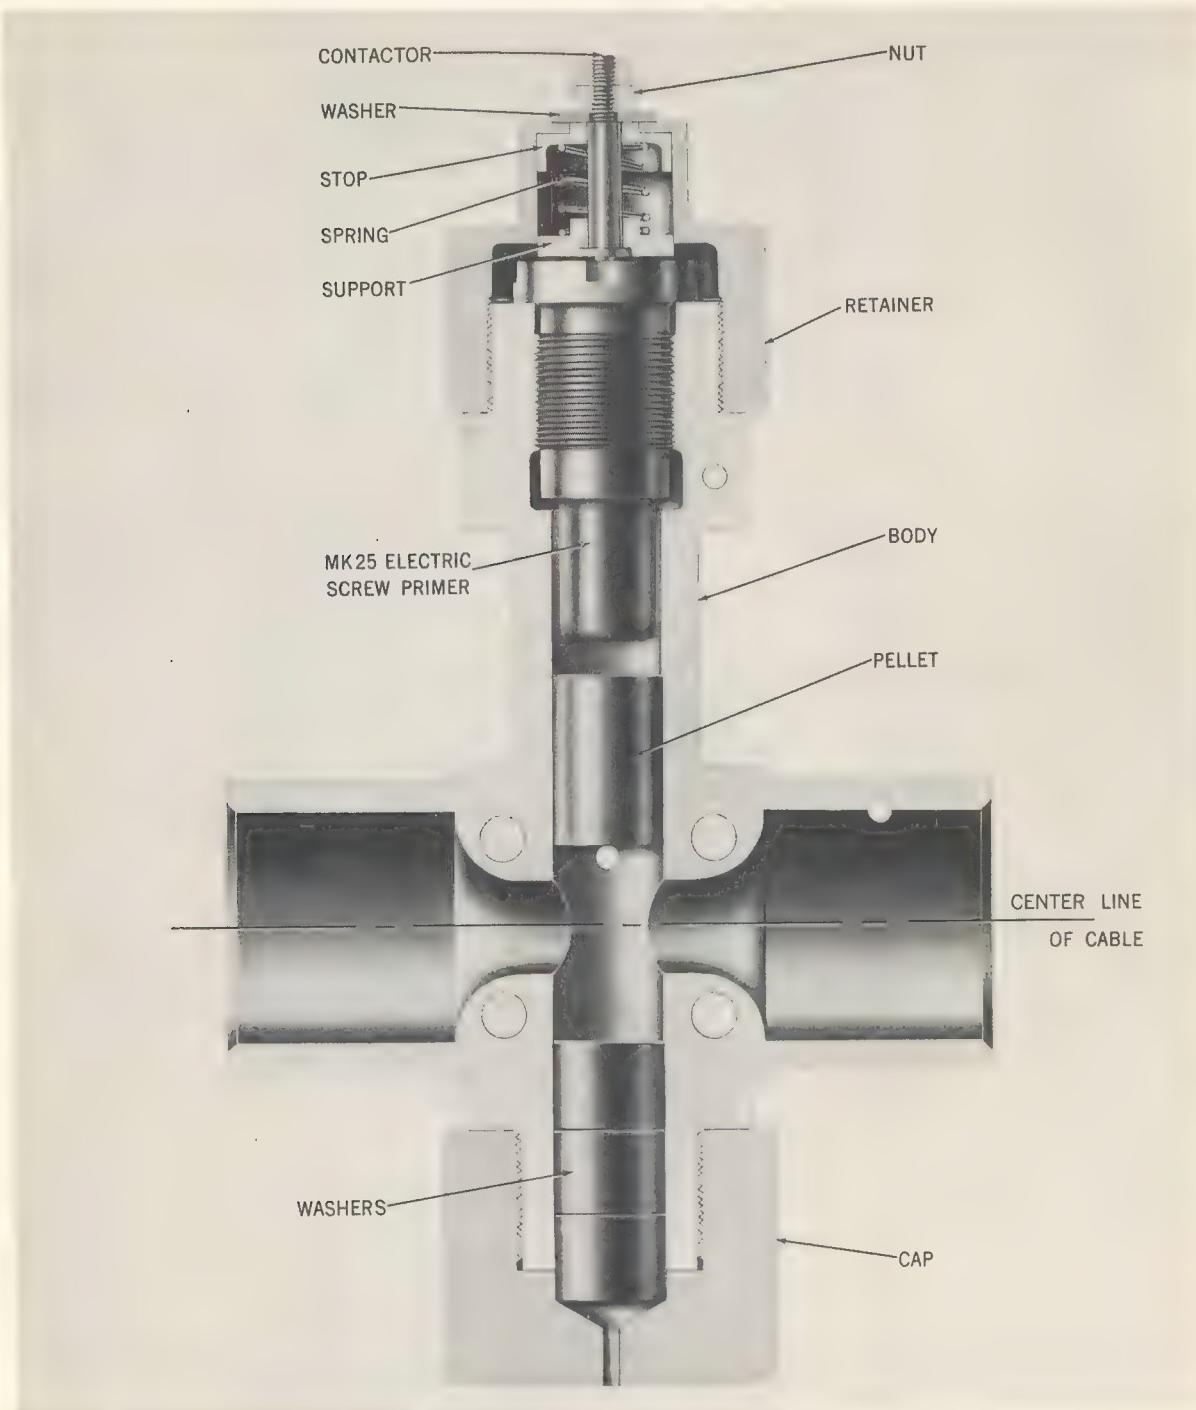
Aircraft Explosive Cable Cutter, Cross Section.
